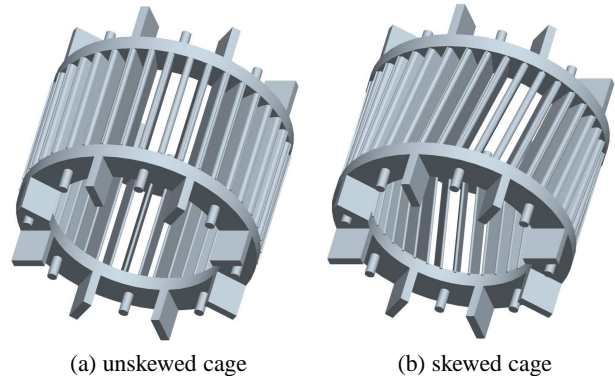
Squirrel cage of an induction machine, consisting of rotor core and a skewed or unskewed cage (bars and end rings)
